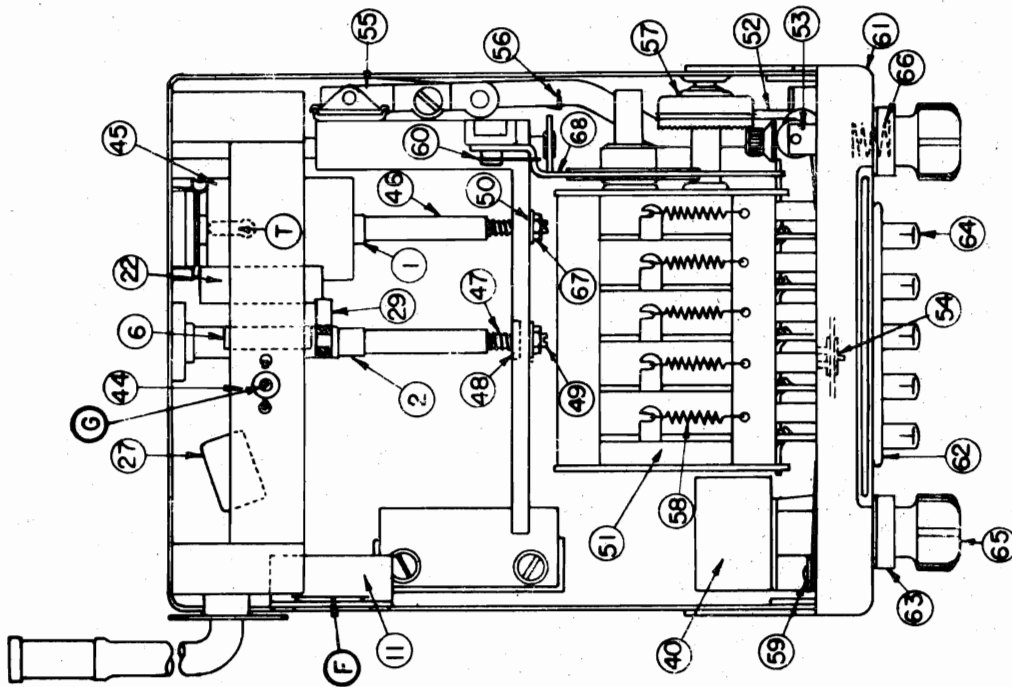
PARTS LAYOUT--TUNER ASSEMBLY
